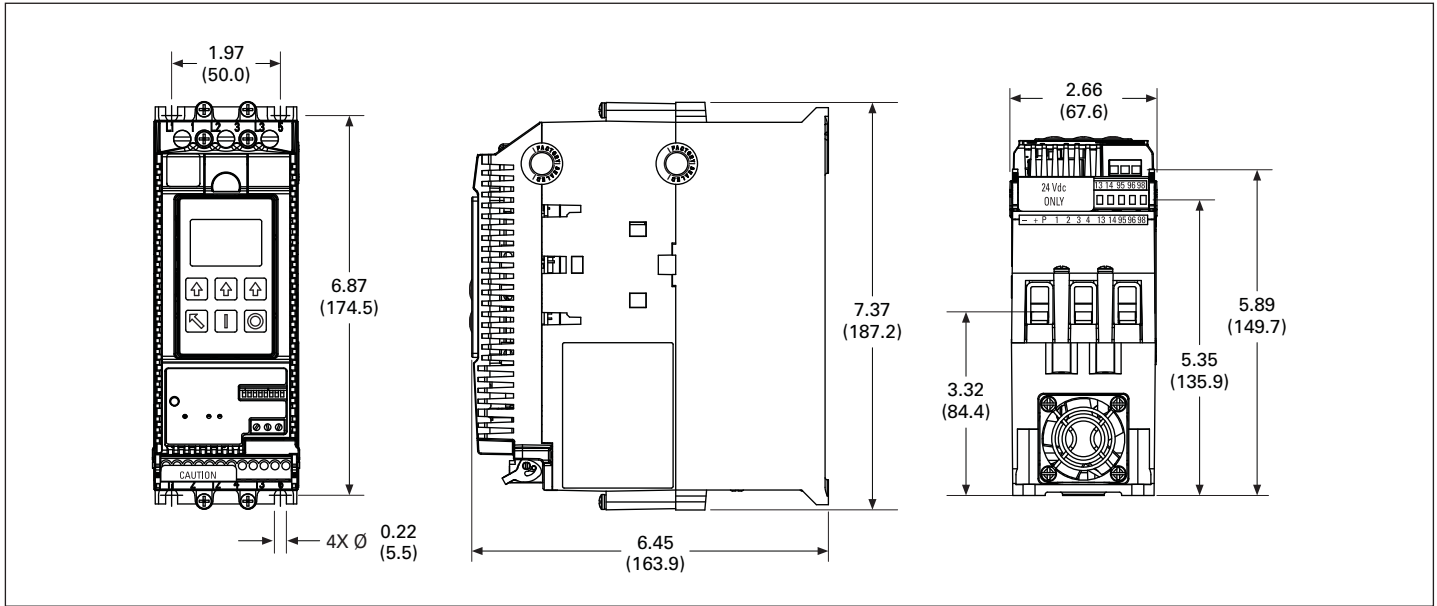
N-Frame (65 mm) S811+ Approximate Dimensions in Inches (mm)
